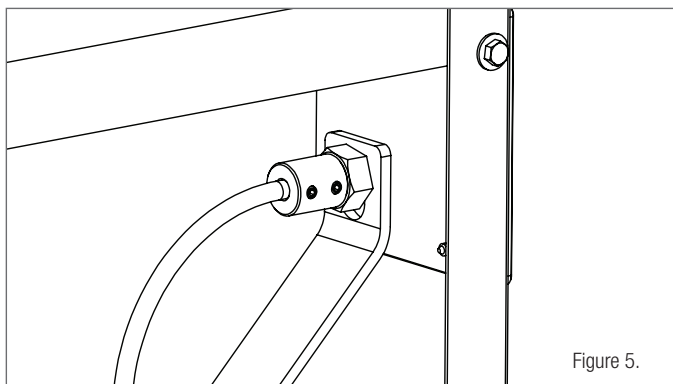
Apply a dab of grease on the outside of the pin and insert it through the hole in the side panel bolt. This will take some effort. Be careful not to kink the flex shaft. Bend it just enough to get the pin through the hole.
